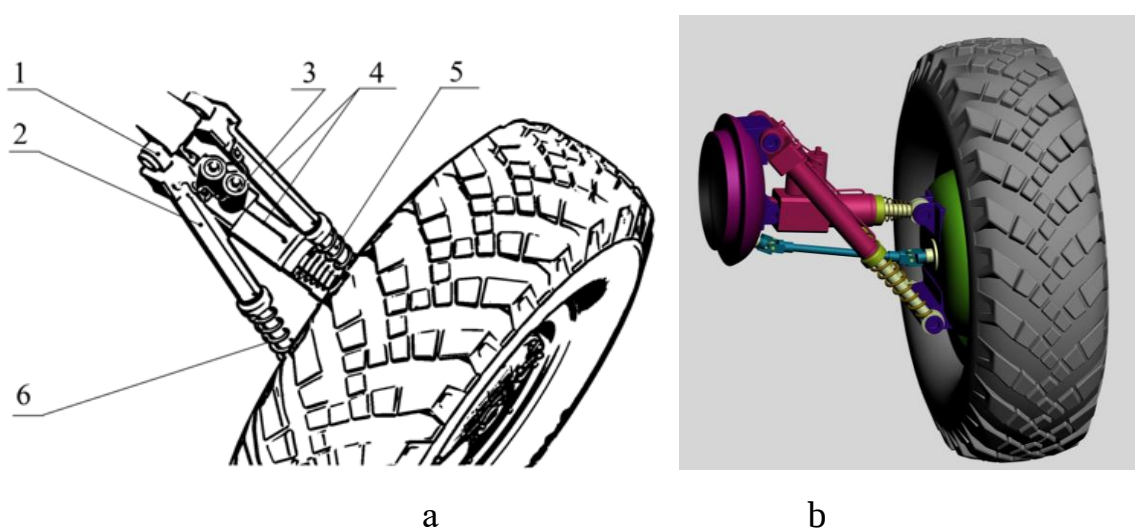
General view of one of the schemes of the proposed equipment: a – general view; b – 3D model
